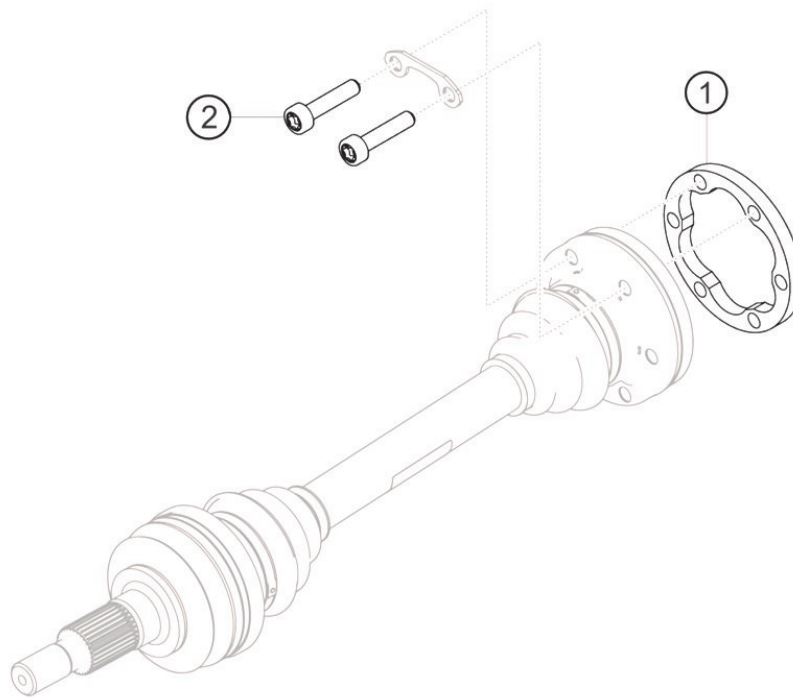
Drive shaft spacer between drive shaft and gearbox flange
